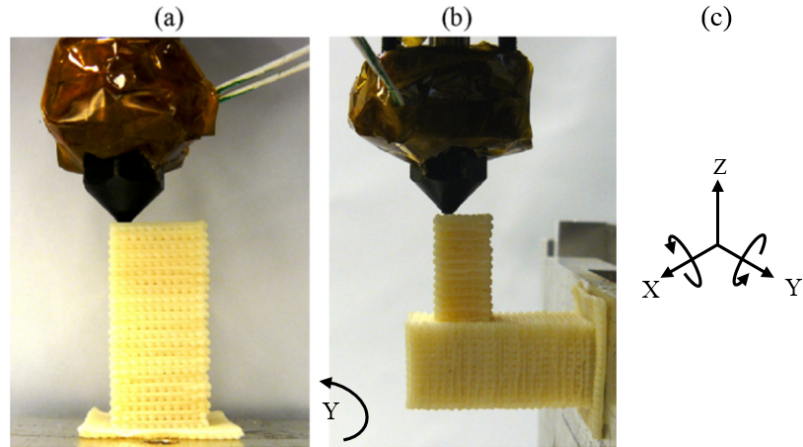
Support Free overhang enabled by 5-axis AM. By first printing the (a) vertical section then (b) rotating the build plate around the Y axis, a horizontal overhang can be achieved without requiring any support structure. (c) The extruder on this machine is also able to rotate round the X axis, enabling 5-axis motion. From [103].
